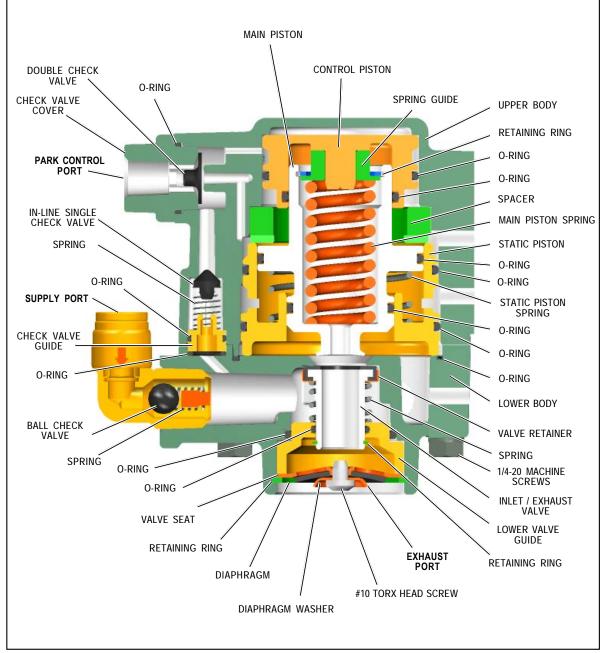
SECTIONAL VIEW OF SR-7 USED IN RELAY VALVE APPLICATIONS
